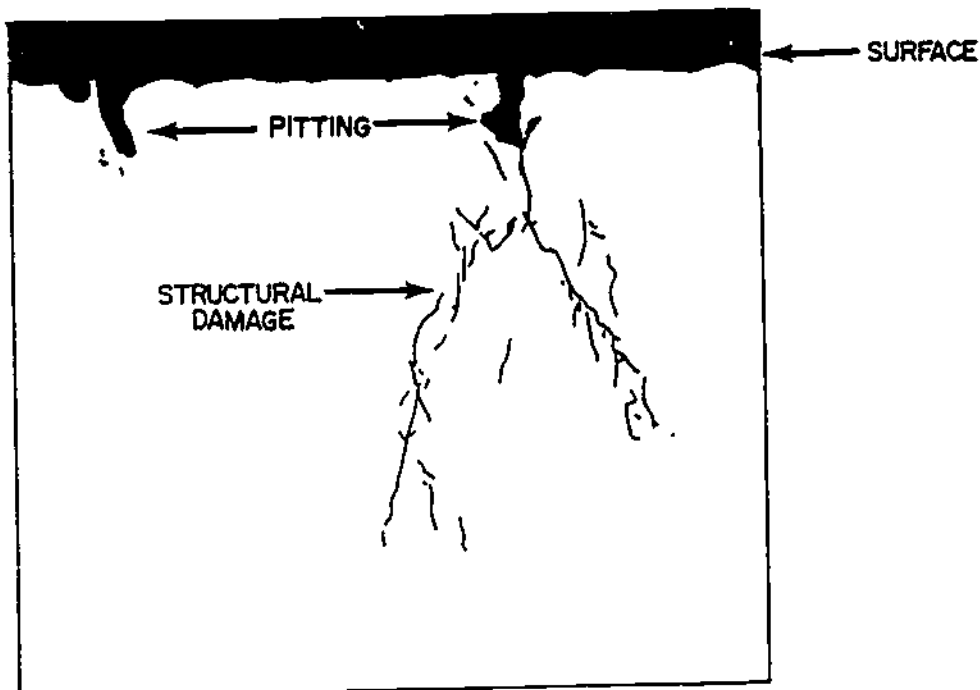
Cross Sectional View of Pitting and Structural Damage. In this case, structural damage resulted from the pitting action.
